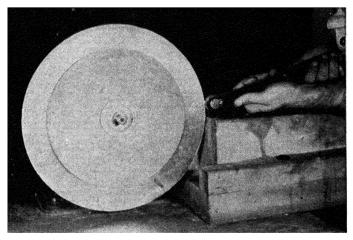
A diamond-charged disk is improved by rolling with a case-hardened grooved roller made for this purpose.
